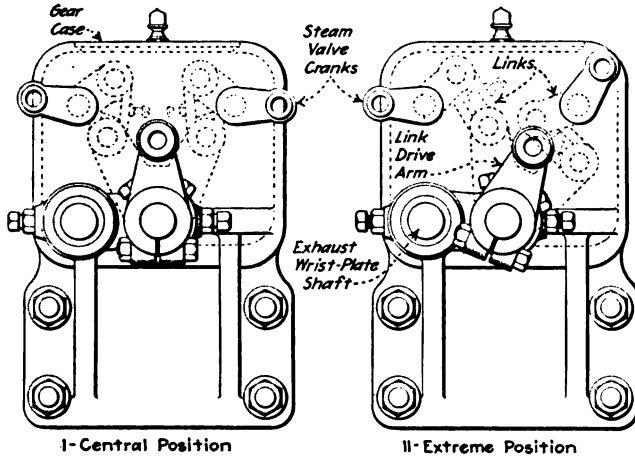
Showing linkwork inside of gear case of Ridgway four-valve engine.
